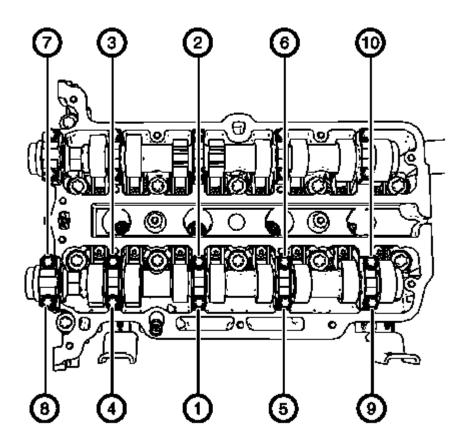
Exhaust Camshaft, Camshaft Bearing Caps And Bolts Courtesy of GENERAL MOTORS COMPANY
